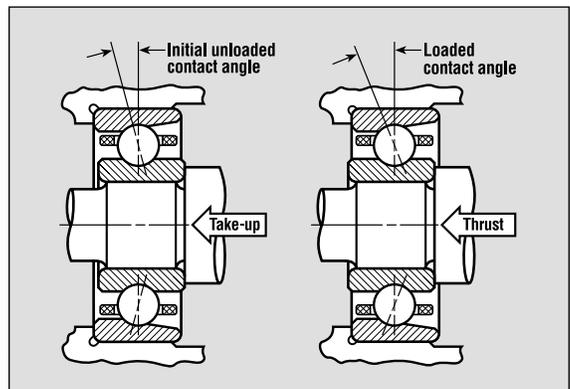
Contact angle refers to the nominal angle between the ball-to-race contact line and a plane through the ball centers, perpendicular to the bearing axis.
